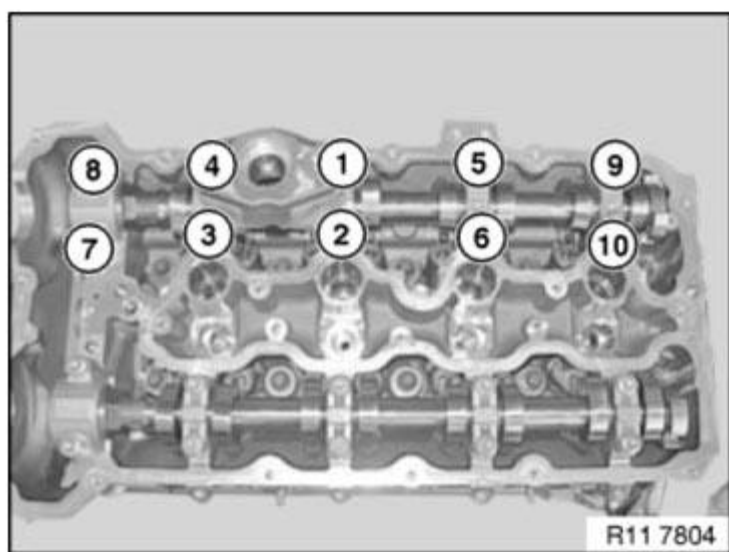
Identifying Camshaft Bearings Bolts Tightening Sequence
